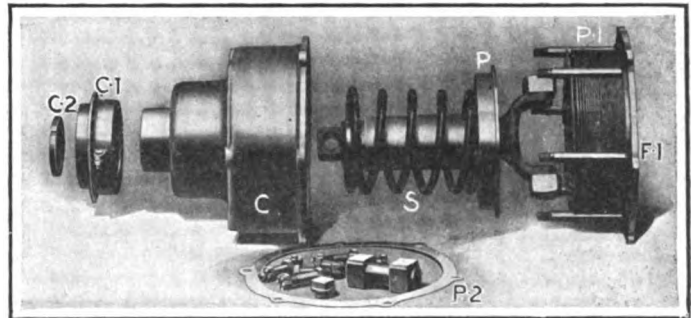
Showing the various component parts constituting the Locomobile clutch
